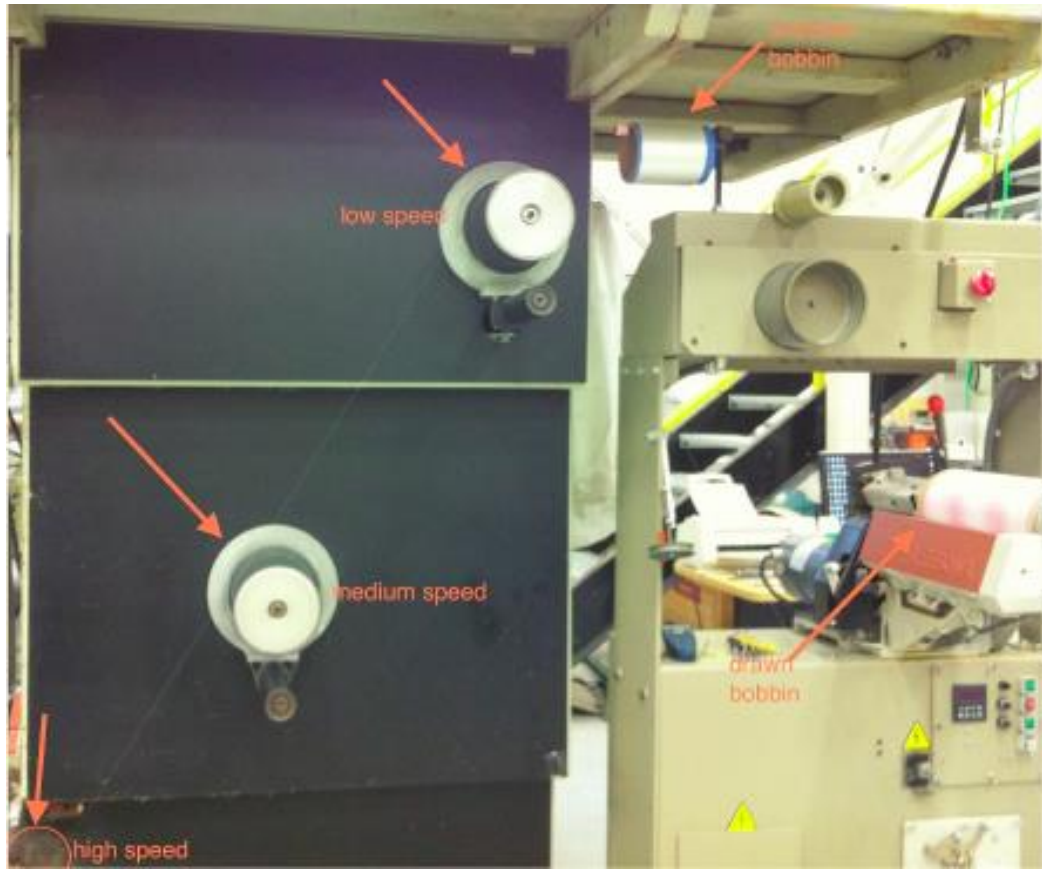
Drawing machine that was used to draw the round PLA yarns
